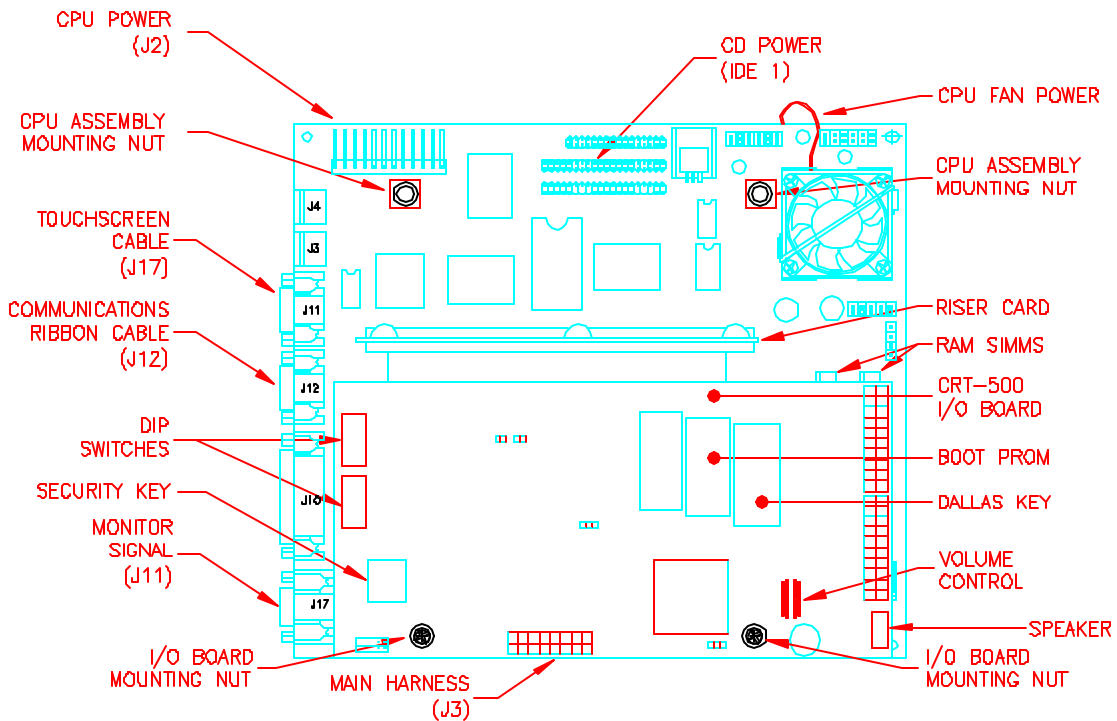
DEAMERITECH MOTHERBOARD AND I/O ASSEMBLY
